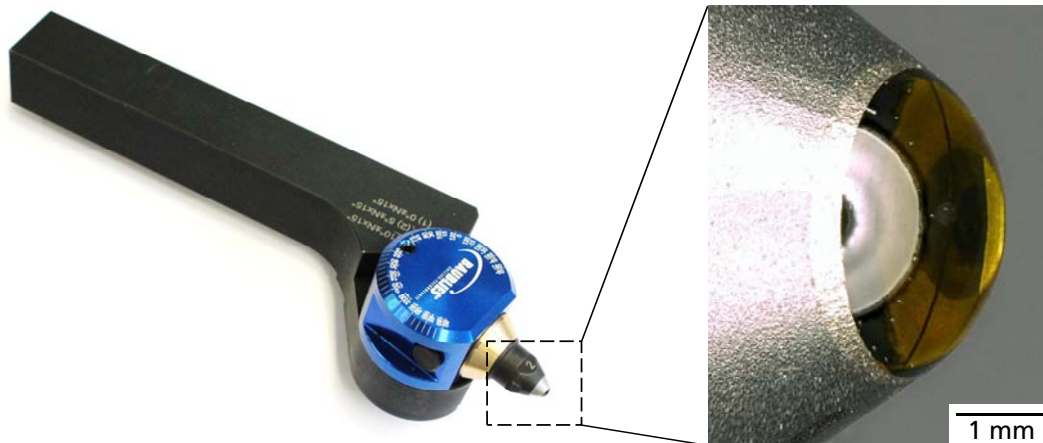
Modified burnishing tools with diamond tip for “hard burnishing”
